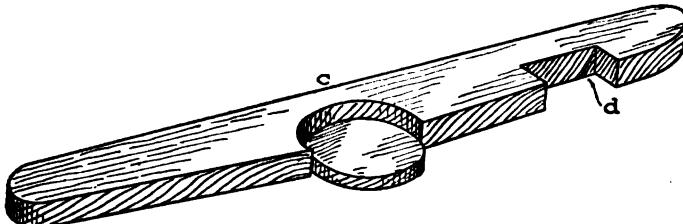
Master Pattern of Part  $c$ , Fig. 352
